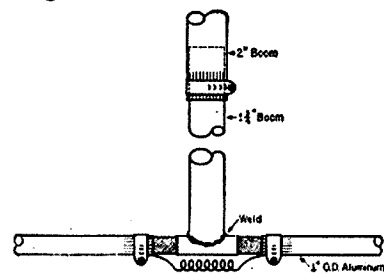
Method of mounting the yagi reflector and director to the boom ends is shown above. The details are given in the text.
